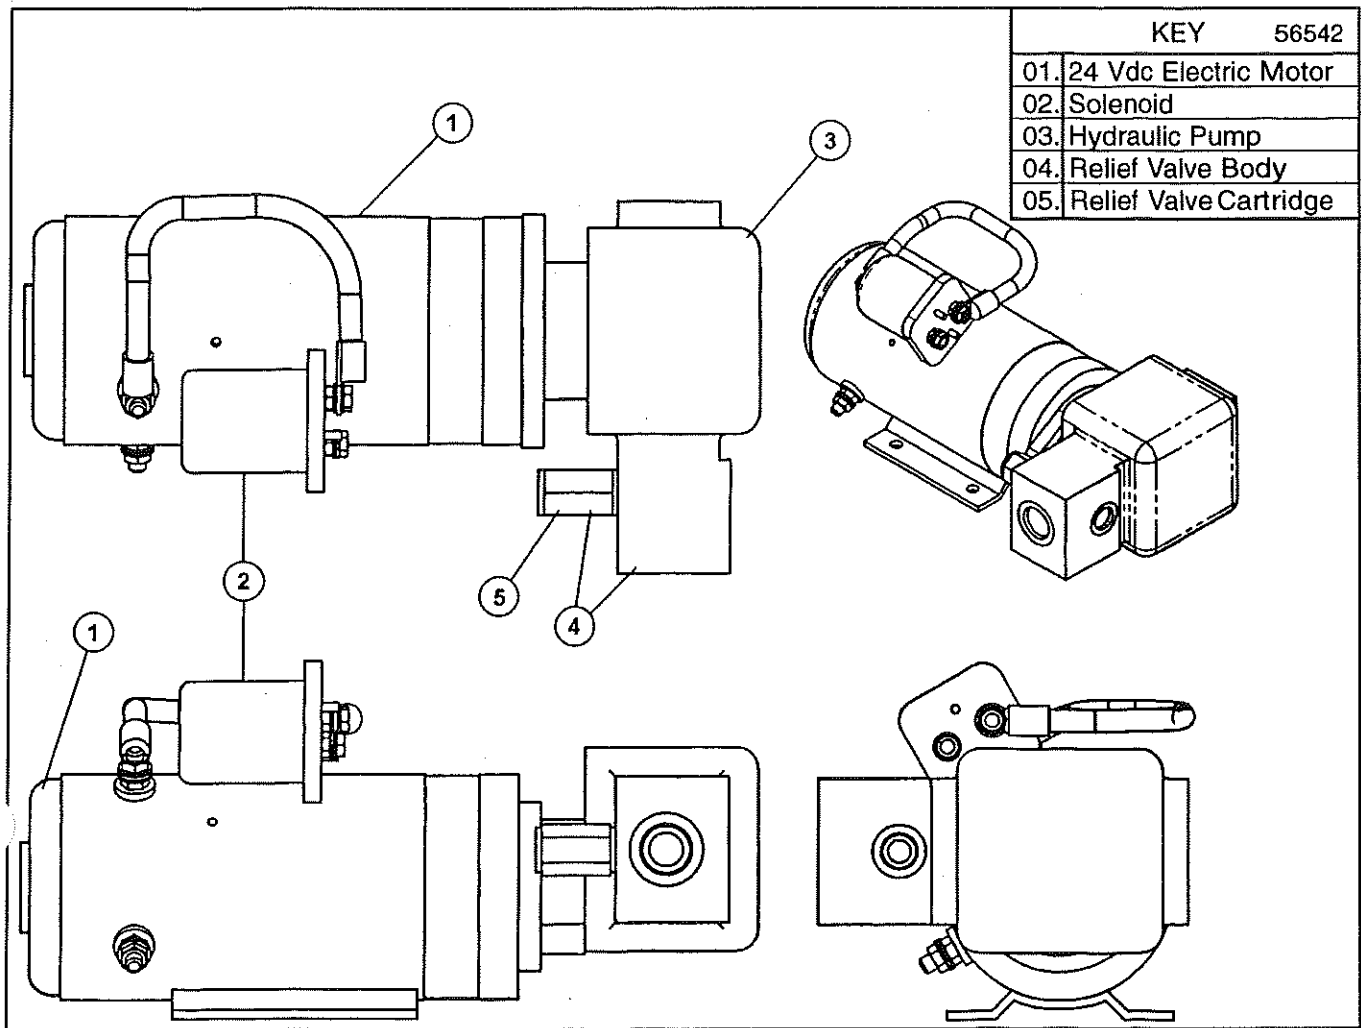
B - LATER VERSION MANUAL POWER SUPPLY PUMP ASSEMBLY
